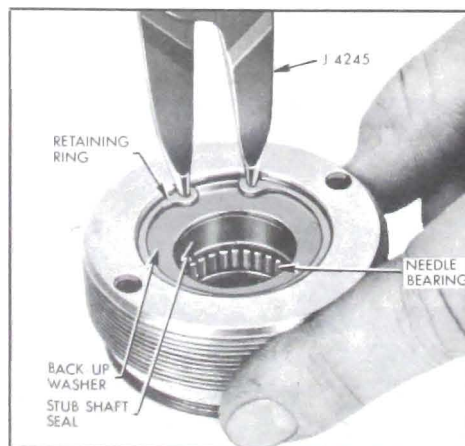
Removing Stub Shaft Seal Retaining Ring
